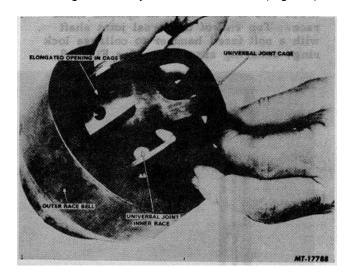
Assembling Inner Race, Cage and Outer Race Bell
